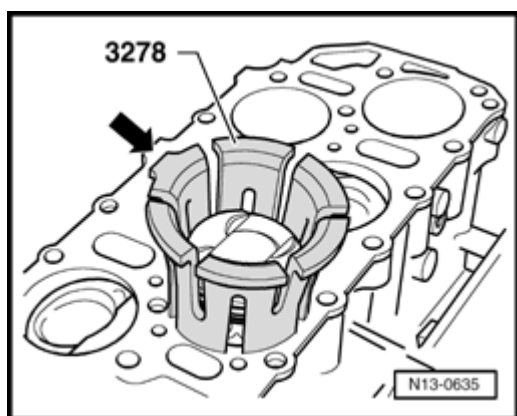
Installing pistons with piston installation tool (funnel) 3278
